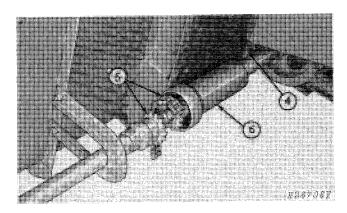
Securing Platform (Left-Hand Drive Shaft Illustrated)
